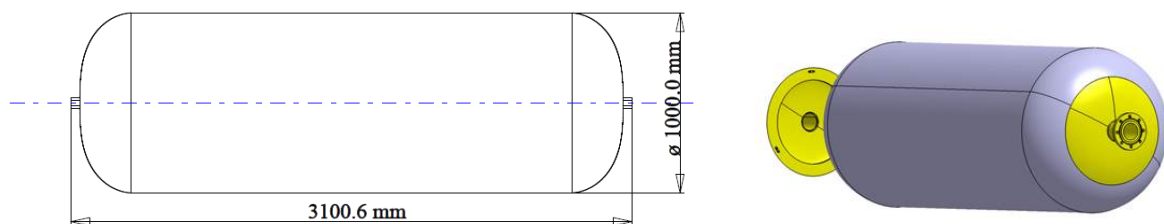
Schematic description of the geometry of the DLR CFRP demonstrator tank (left), Assembly design of the liner with metal-domes (right)
